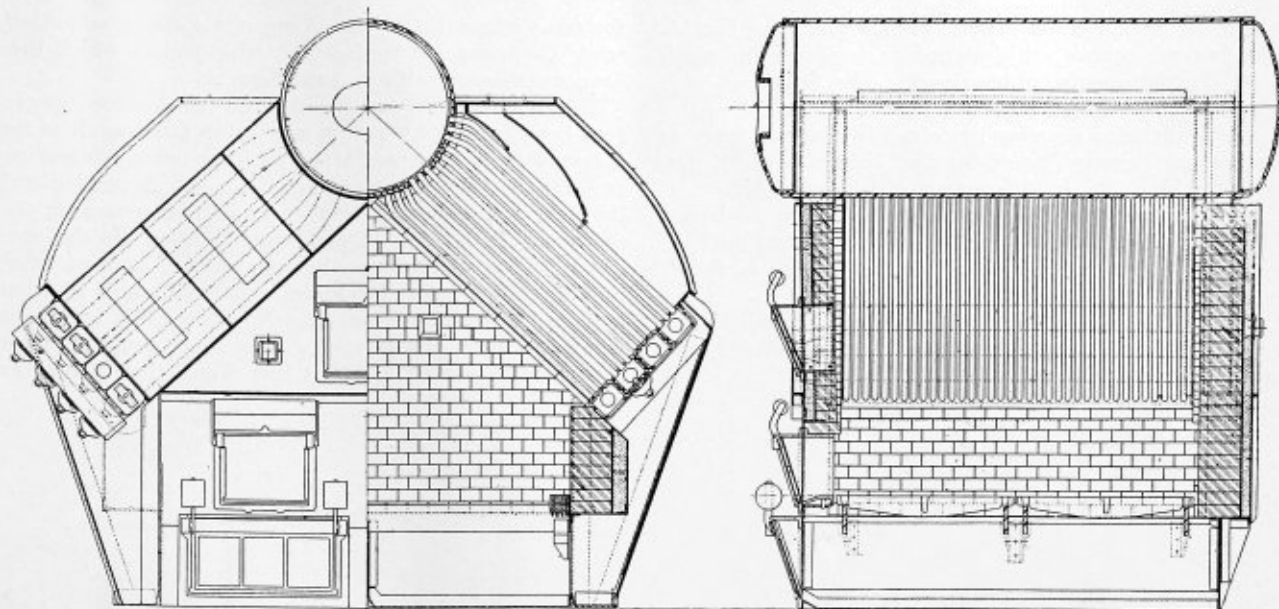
Box Type Watertube Boiler, Built by the Babcock & Wilcox Company
